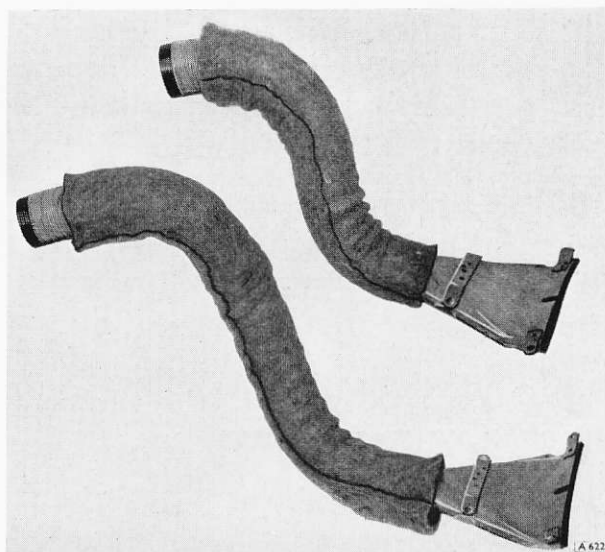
Method of attaching anti-rattle felts to the de-mister ducts
